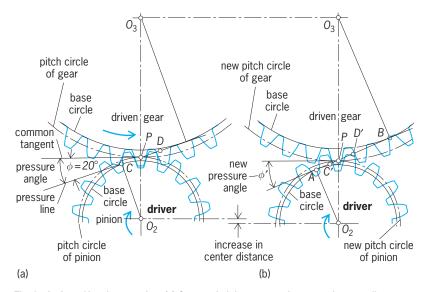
Action of involute gearing. (a) Gear and pinion mounted at normal center distance. (b) Gear and pinion mounted at greater than normal center distance. (After J. E. Shigley, Theory of Machines, McGraw-Hill, 1961)
